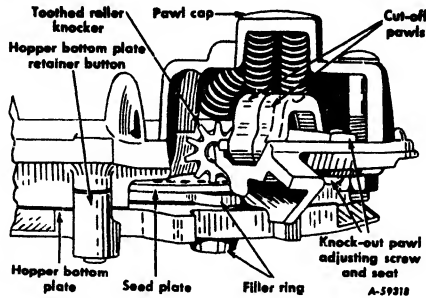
Showing hopper bottom with parts for planting segmented beet seed. (*International Harvester Company.*)
